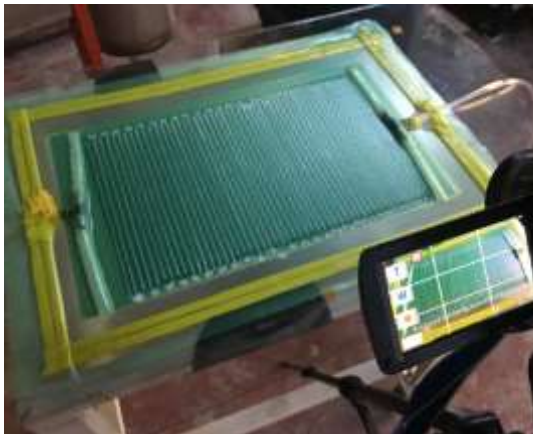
Photograph of vacuum bag assembly during infusion of the top skin
